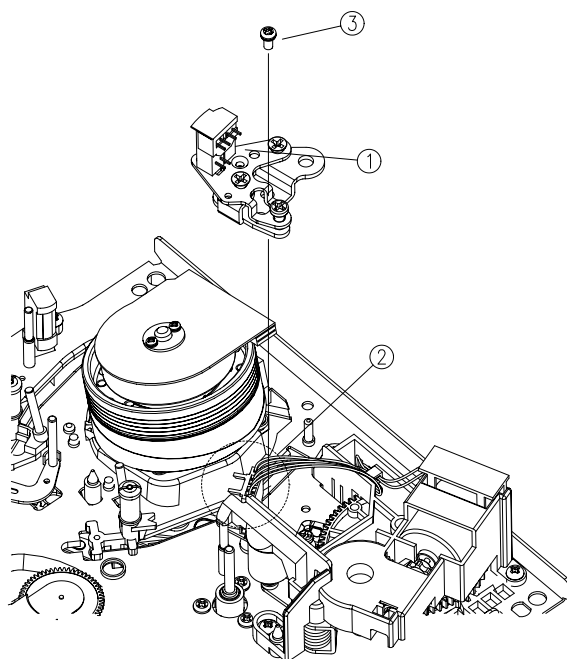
Disassembly of the AC HEAD ASS'Y
